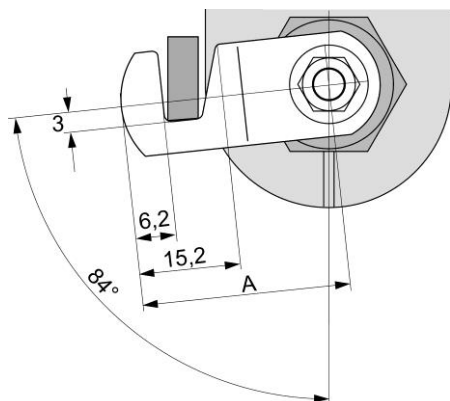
Dimensions for latches with hook ends (measurements in mm)
